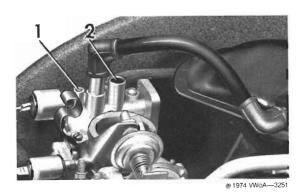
Idle adjustments for the dual-carburetor engine's central idling system. The idle speed adjusting screw is at 2; the idle mixture screw is at 1
